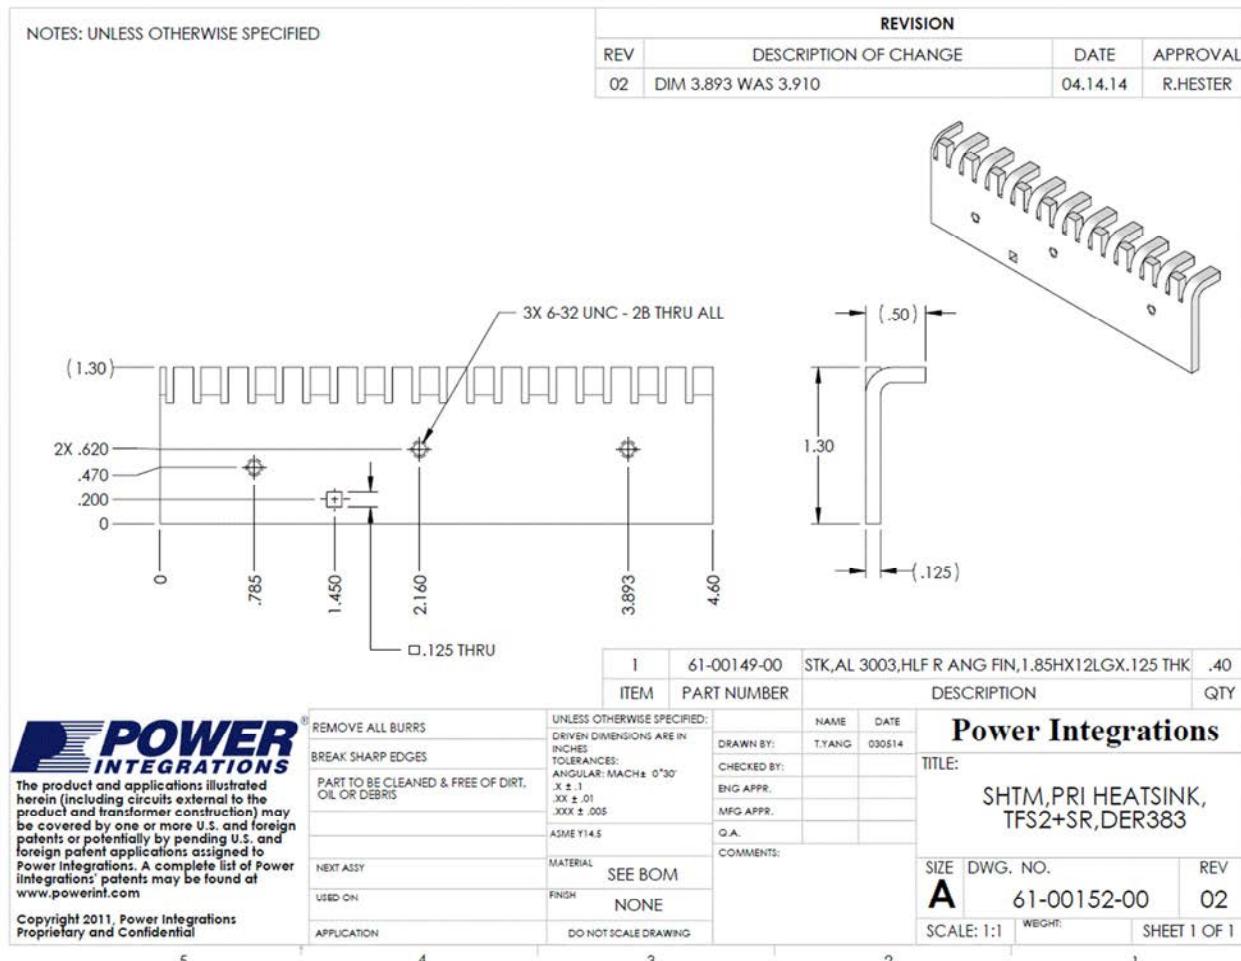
Primary Heat Sink Sheet Metal Drawing.
